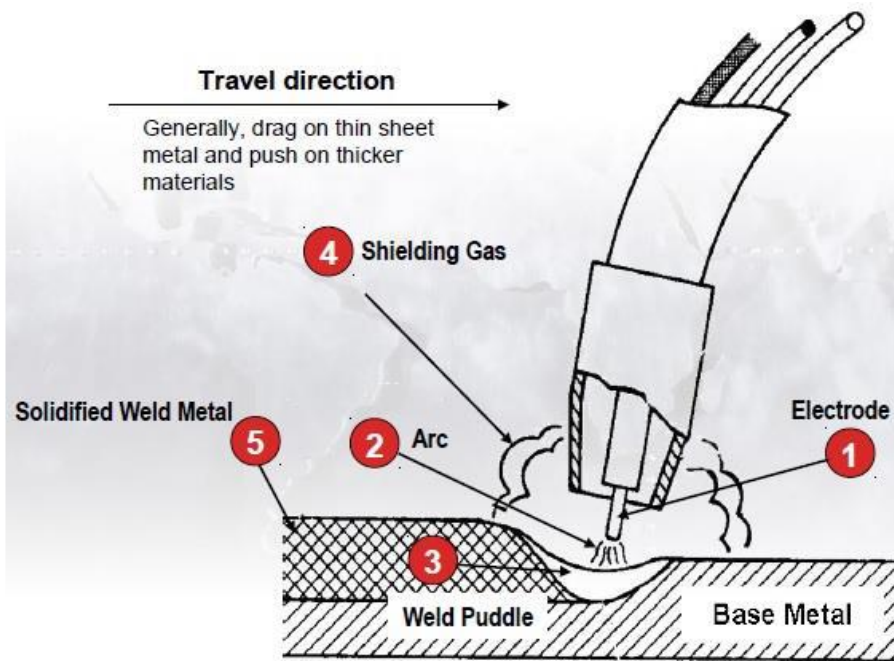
GMAW Shielding Gas Nozzle (Ahmed, 2022)
